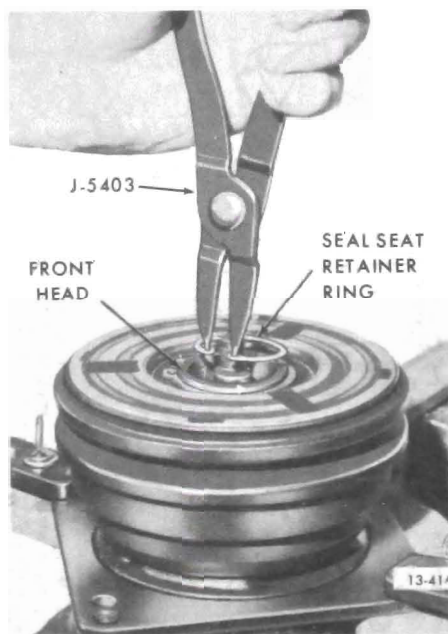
Removing or Installing Shaft Seal Seat Retaining Ring
